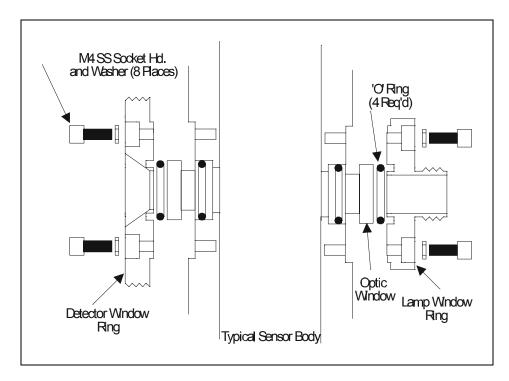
Typical Window Assembly for OUSTF10 Turbidity Sensors
